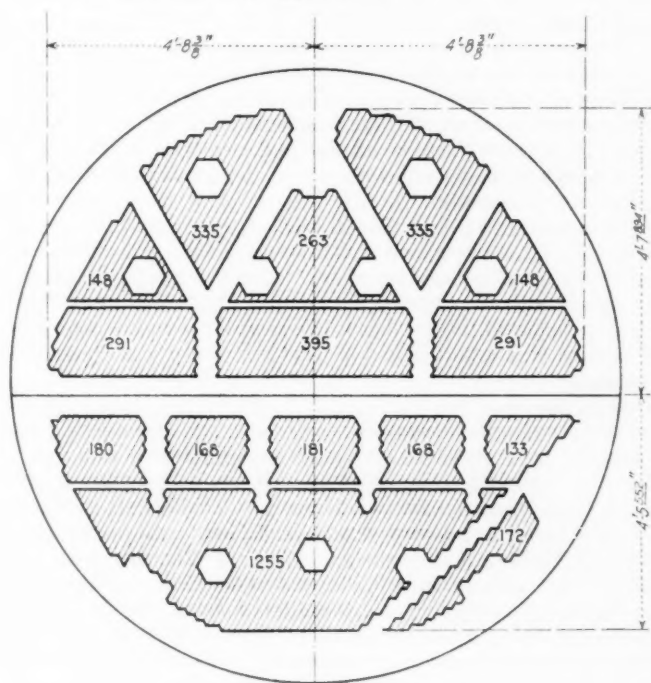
TUBE-SHEET LAYOUT OF 22,000-SQ. FT. SINGLE-PASS CONDENSER, 1917
